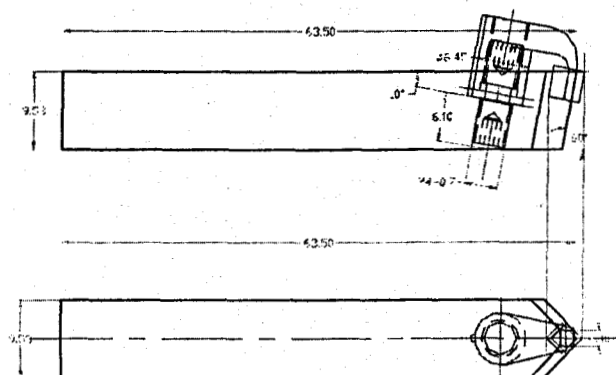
The drawing of diamond cutting tool with cubic cutter and steel holder
